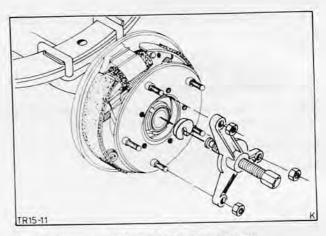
Remove hub with special tool no. 15–060 ('F' axle shown)
